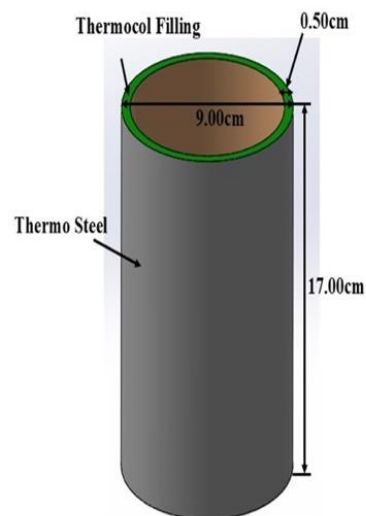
Cross-sectional design of frost heave test mold with thermocol insulation and steel casing.
